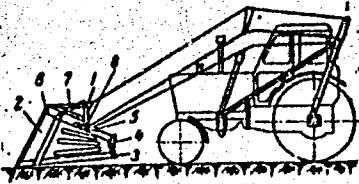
1- extension frame; 2- scoop; 3- unloading opening;
